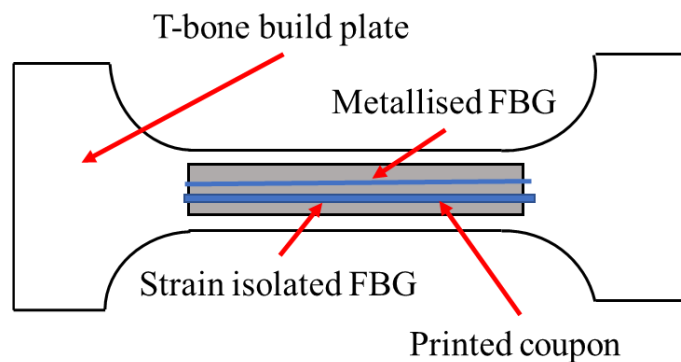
Illustration of build plate and coupon design for strain testing purposes.
